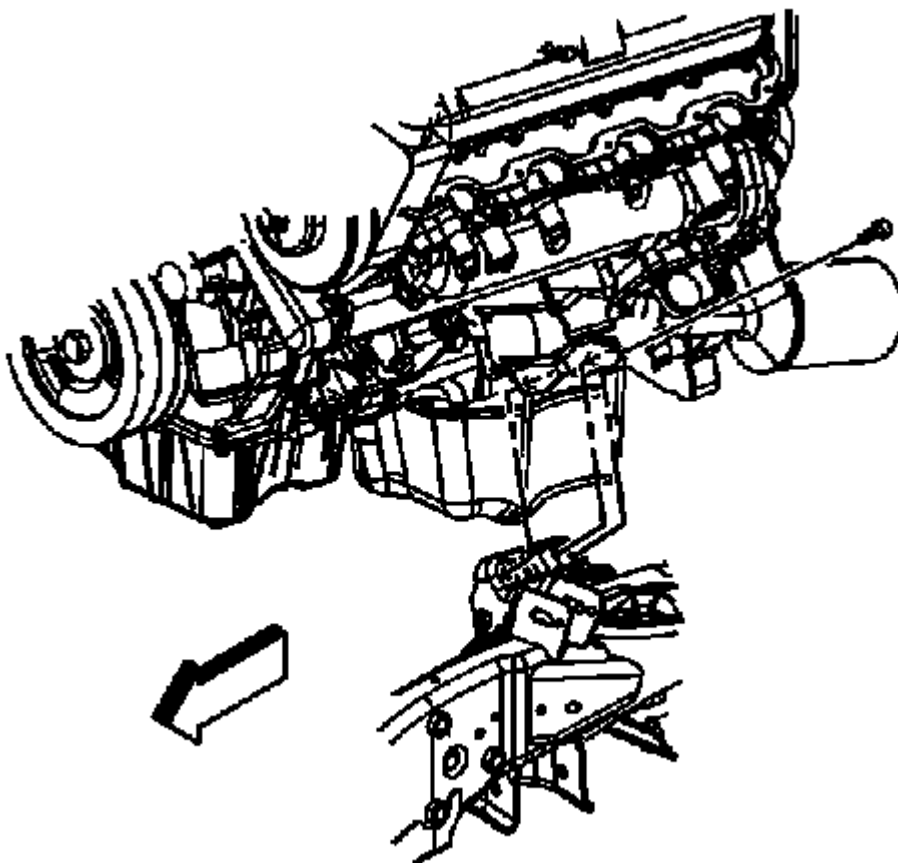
View Of Engine Mount To Engine Mount Frame Bracket
